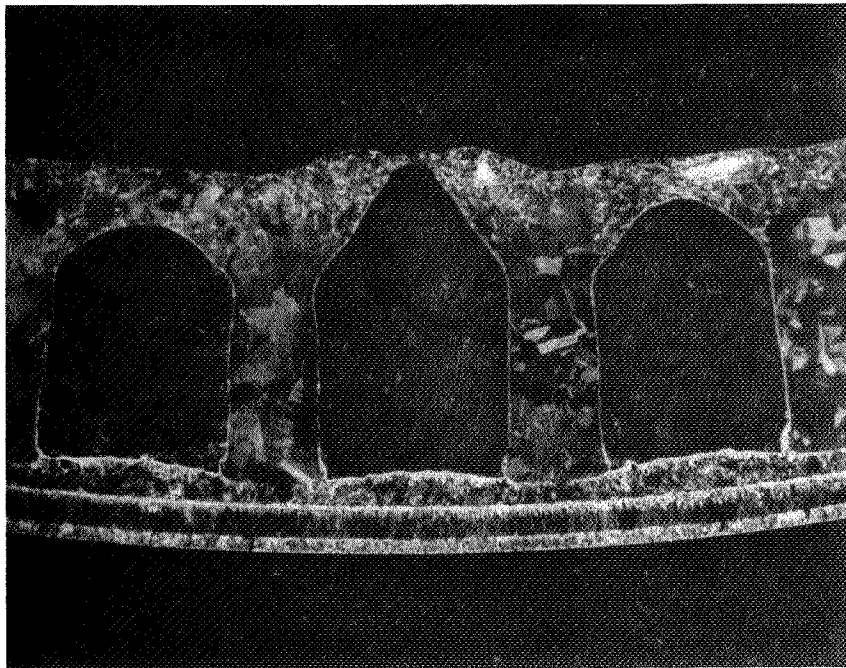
Crack in coolant-channel wall of chamber 75. X10.
